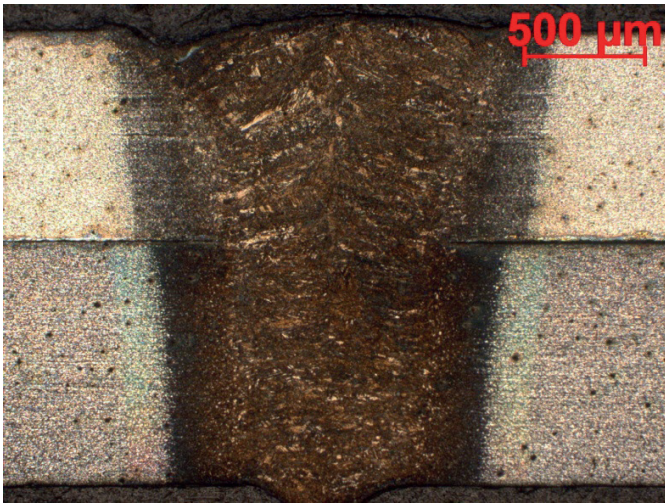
Macrostructure of the joint welded using a dual beam positioned in series; welding rate: 9 m/min, distance between the beams: 1 mm
